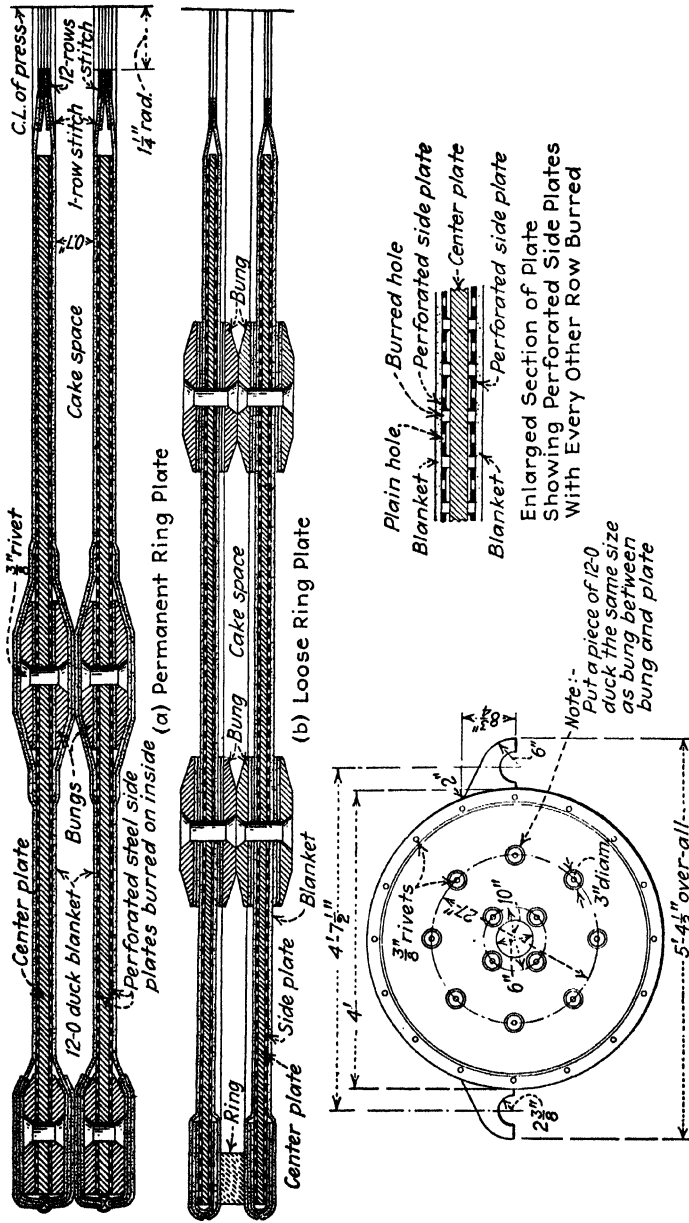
Details of filter plates. (a) Permanent-ring type; (b) loose-ring type. (Carbondale Machine Company.)
